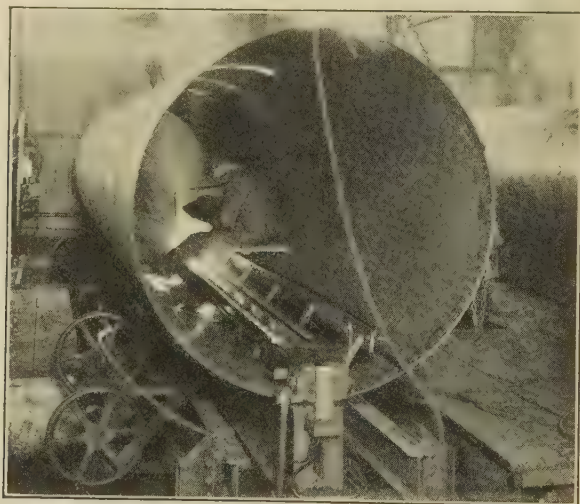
Automatic carbon-arc-welding machine for pipes.
